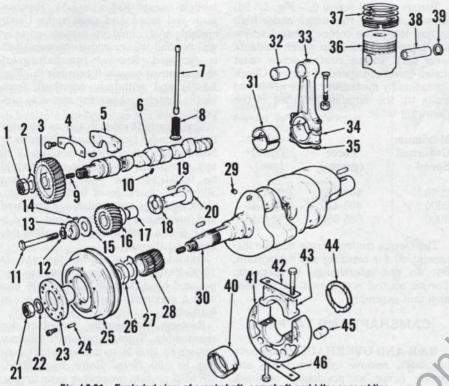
Exploded view of crankshaft, camshaft and idler ssemblies.
